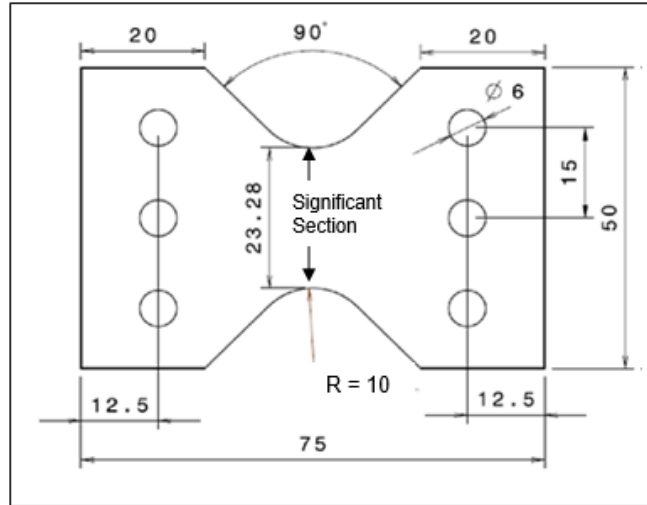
Butterfly-shaped Arcan specimen (dimensions are in mm)
